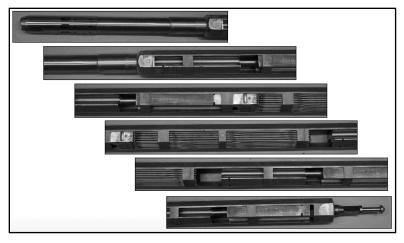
Photograph of a cut-away EBR-II driver fuel subassembly. (DOE photograph)
